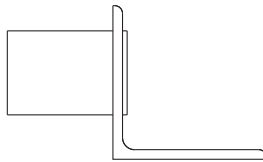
90° Bracket and Coupling, P/N 263363
